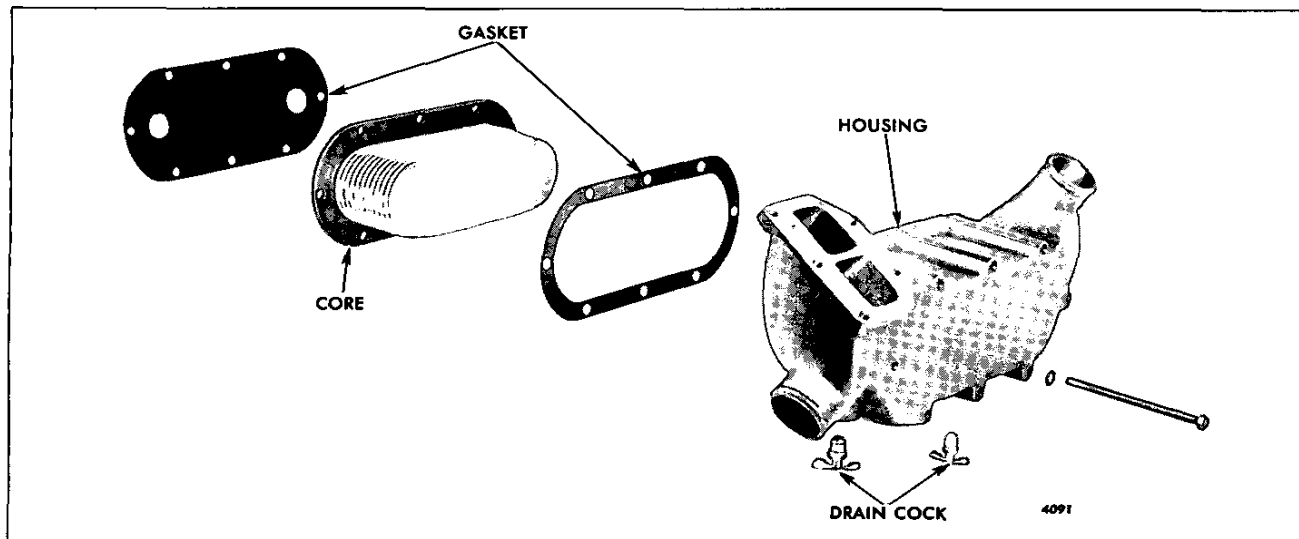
Oil Cooler Details and Relative Location of Parts (6V or 8V engine)
